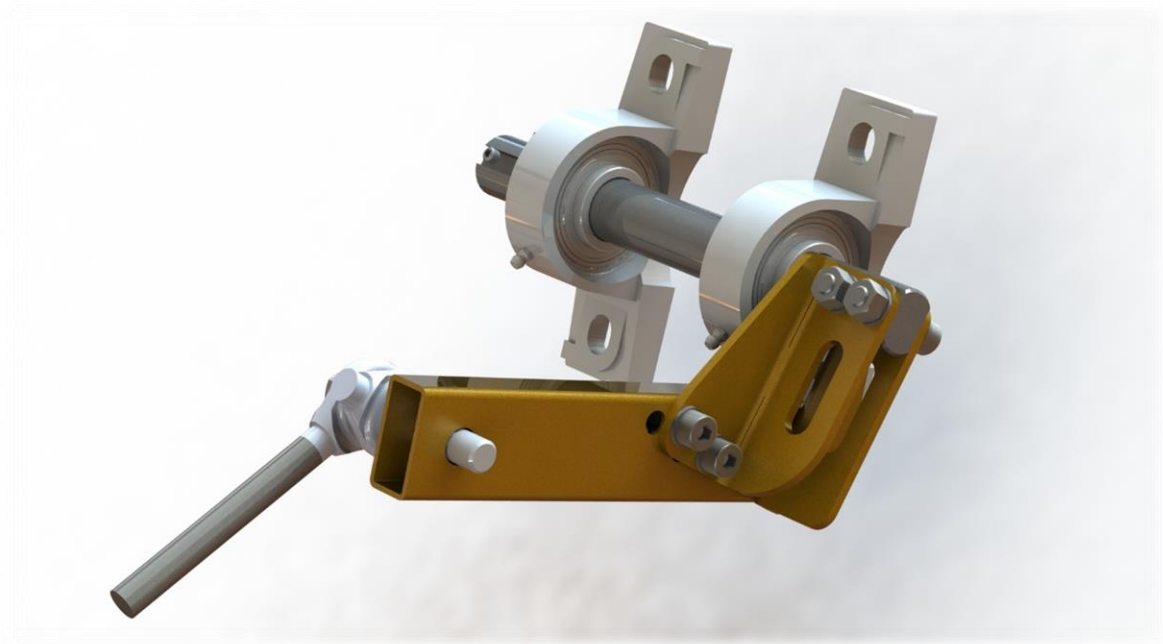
Upper crankshaft of “3-Joint” mechanism.
